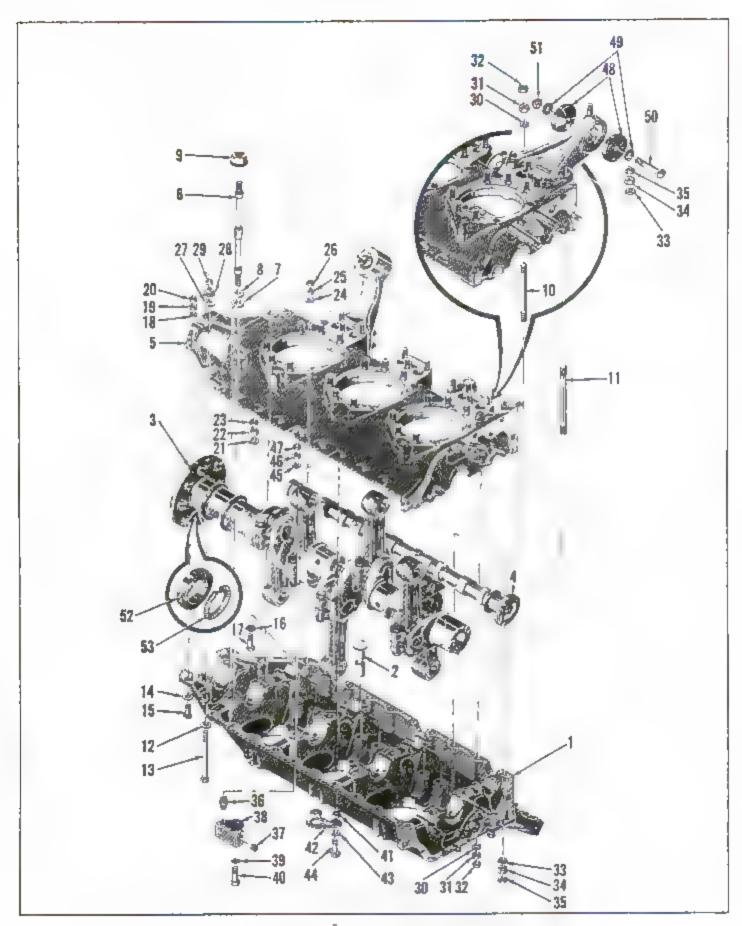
Crankcase Assembly Procedure (Sheet 1 of 3)
